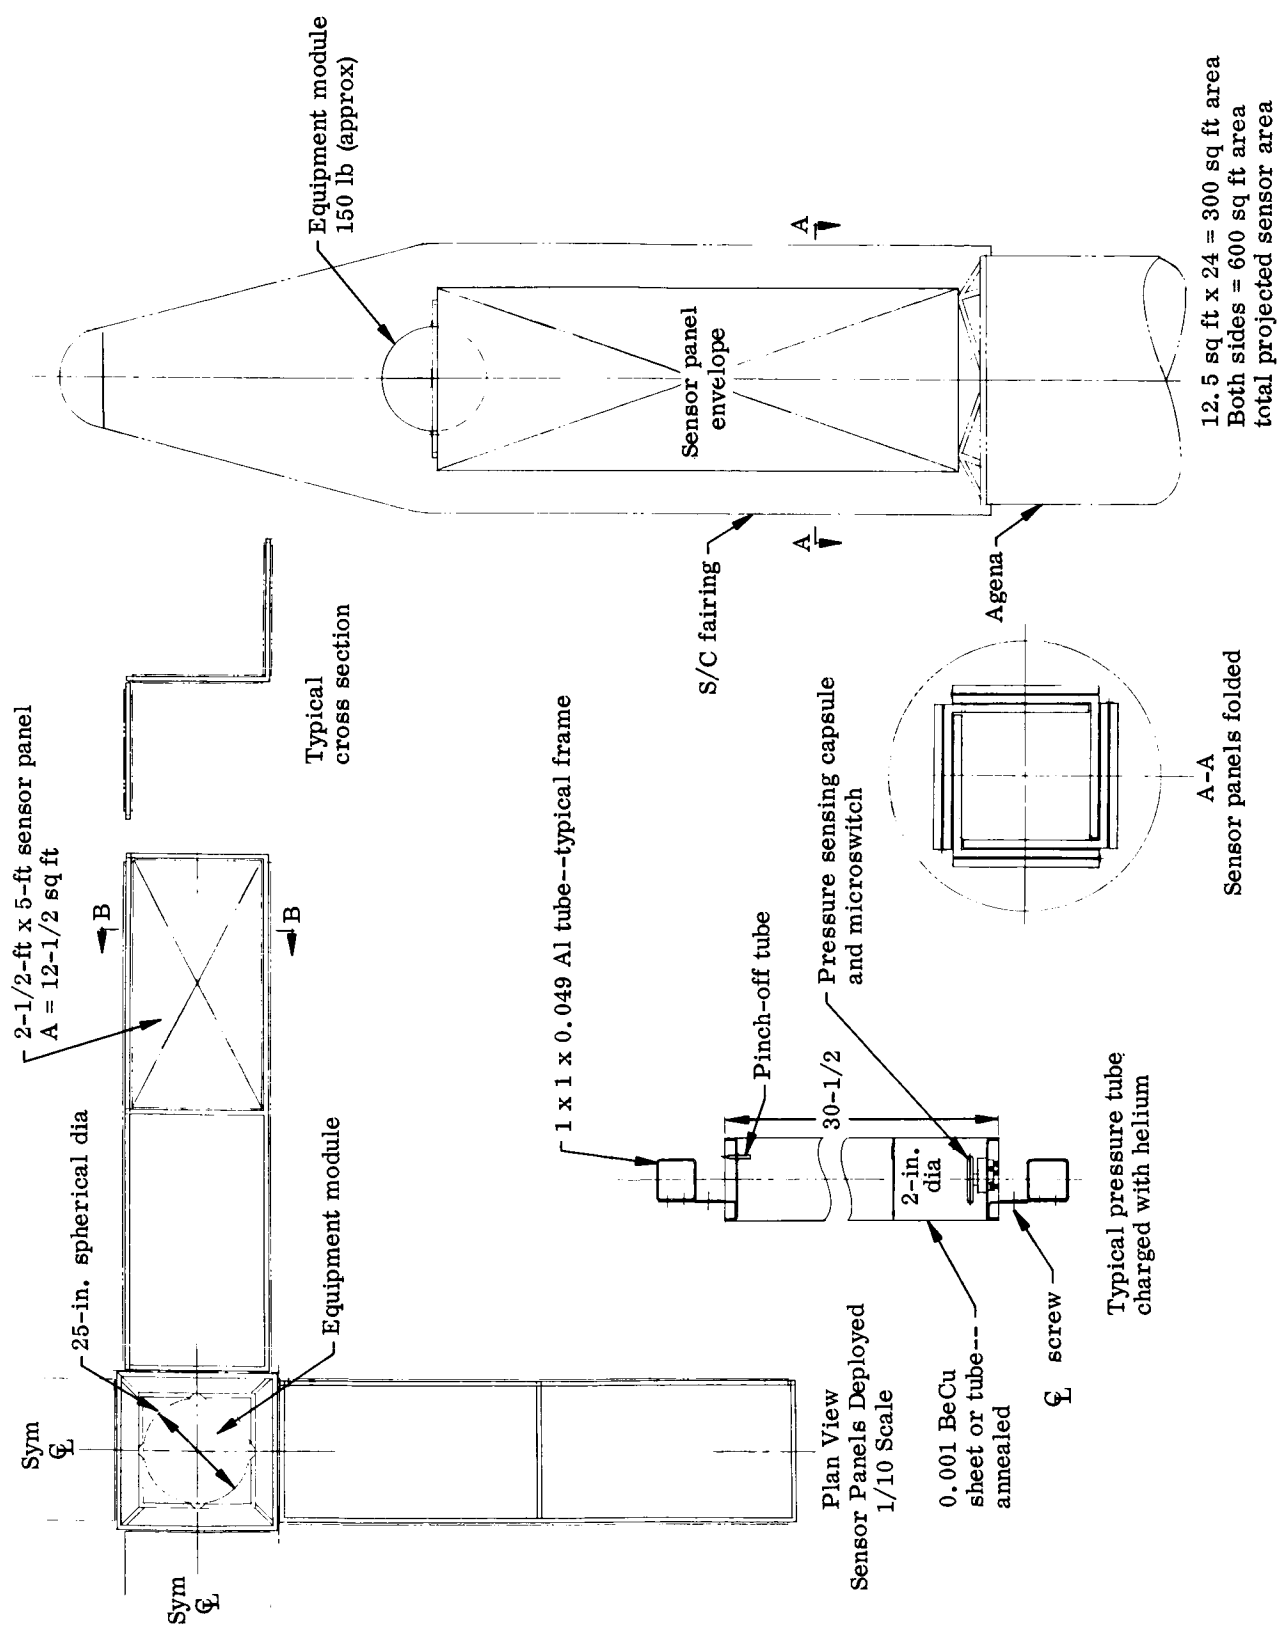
Zee Configuration, Pressurized Cylinder Sensors--Agena
